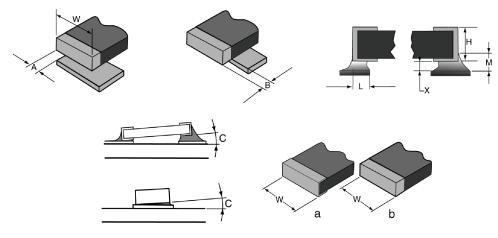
Mounting of rectangular and square end-capped and end-metallized devices
